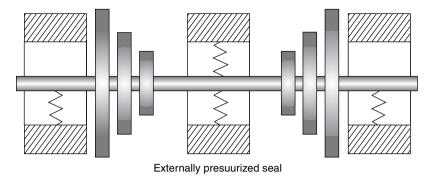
Side view of a rotor system with an additional spring at the midspan seal location.
